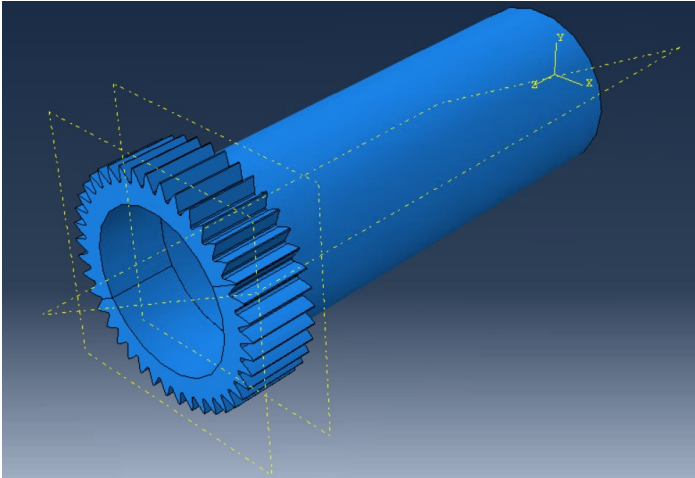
Abaqus representation of the assembly between input shaft and the sun gear
